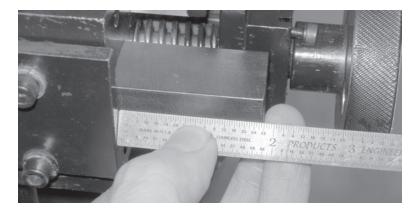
Slide the tool holder in to position the end of it the same distance from the tool holder plate as you measured previously.
